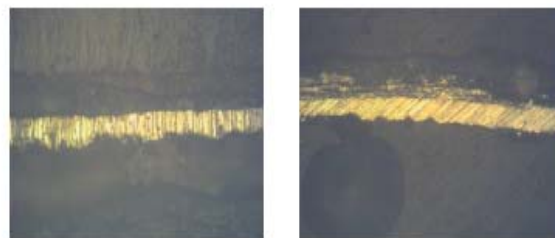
sample picture of the circularity of the drill hole; (a) drill hole with magnet, (b) drill hole without magnet
